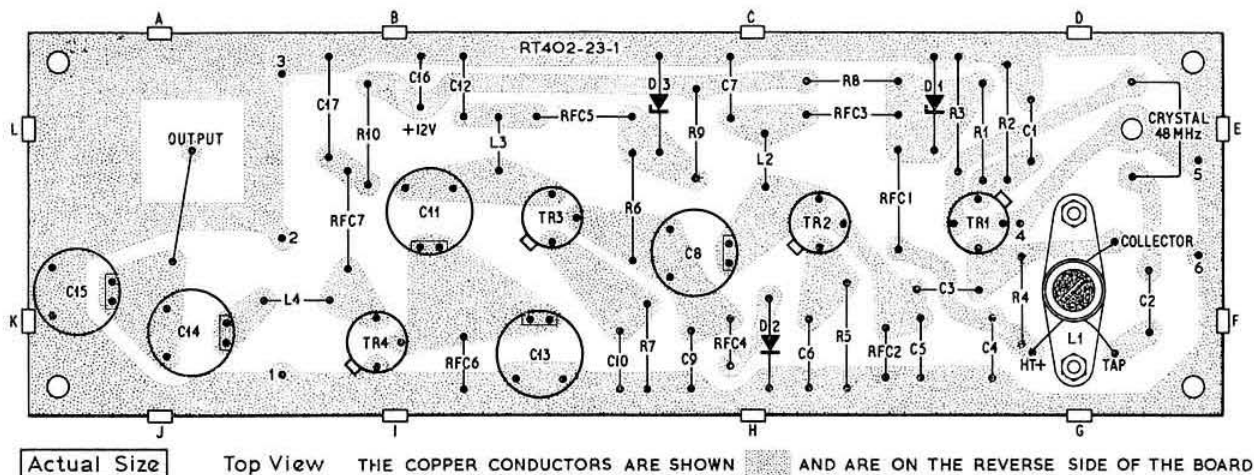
Printed board layout. This is a modified version of the original Mullard board. Boards supplied by J. R. Hartley, Ref [4], will have the original layout
